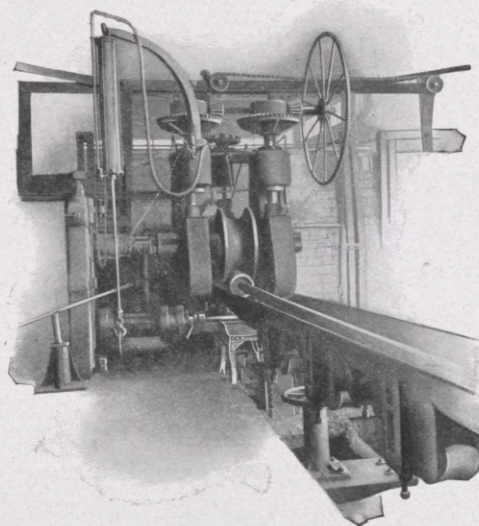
DRAWING BUTT-WELD PIPE
